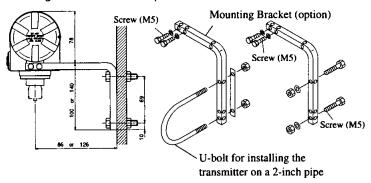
Example of installing the transmitter using the mounting Bracket
